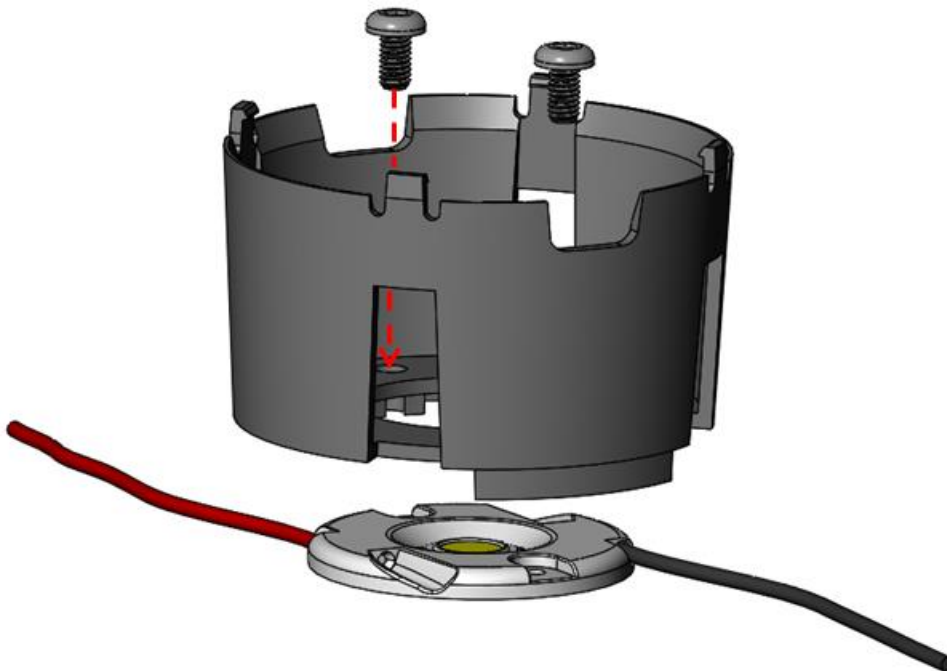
Two M3 screws on 35mm centers secure the Fraen Lens Holder and press the Electrical Connector and COB LED to the heatsink.
